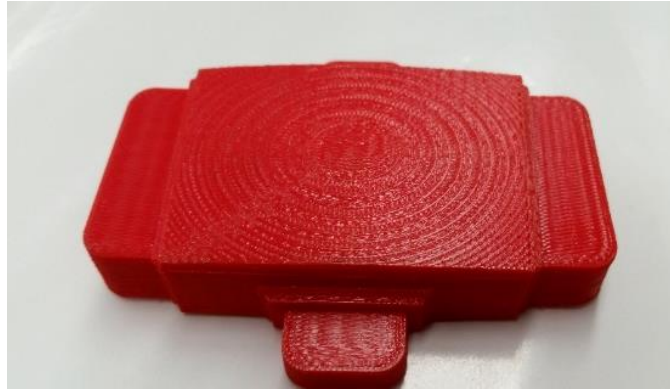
PLA patten printed on the Makerbot Replicator 2.
